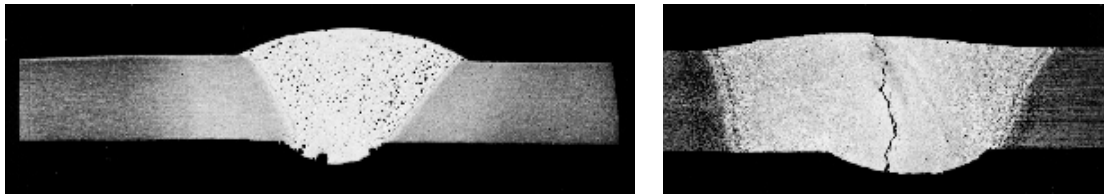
Porosity (left) and hot cracking (right) in aluminium welds [12].
